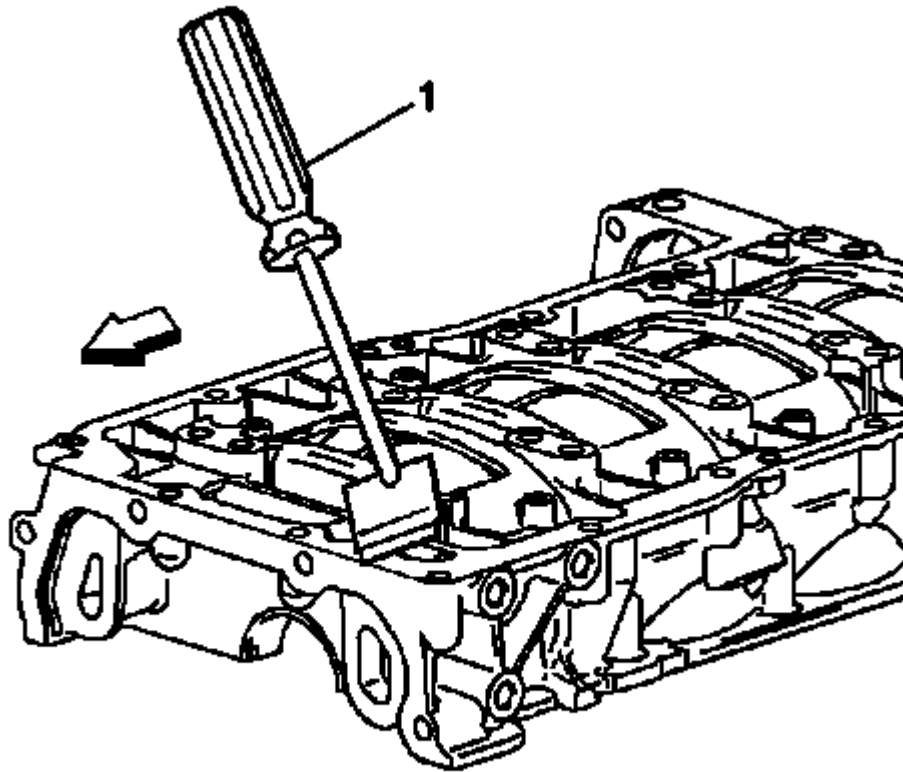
Clean Sealing Material From Gasket Mating Surfaces On Lower Crankcase Engine Block Side With Suitable Tool
